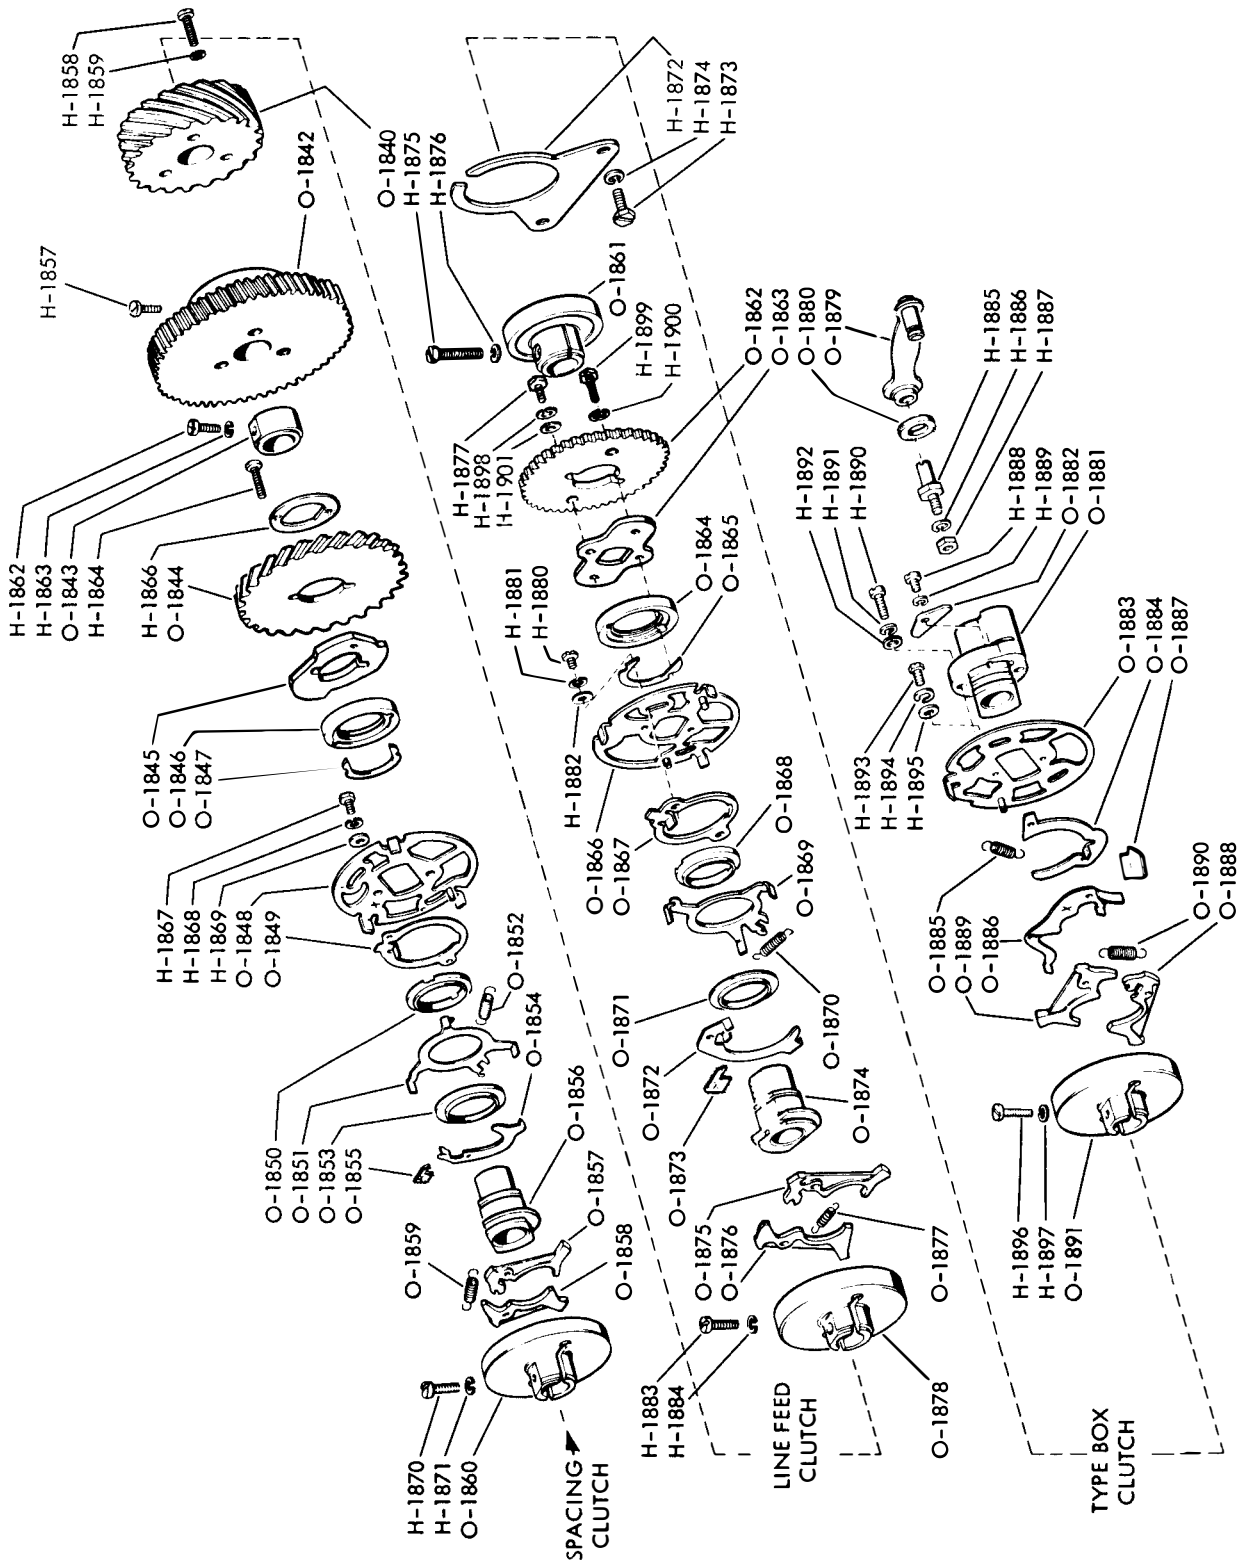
Automatic Typewriter, Main Shaft Mechanism
